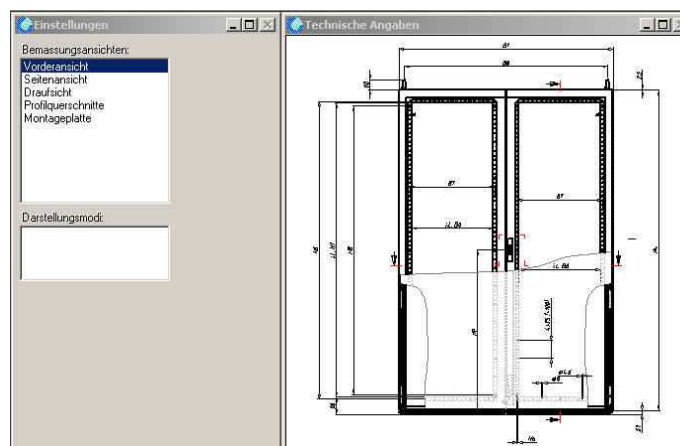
2D preview with indication of dimensions on e.g. a TS 8 enclosure
